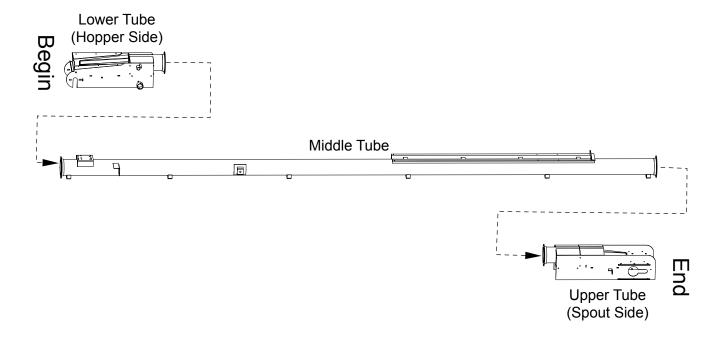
Conveyor Tube Layout for 1200 Series Top Drive Models
